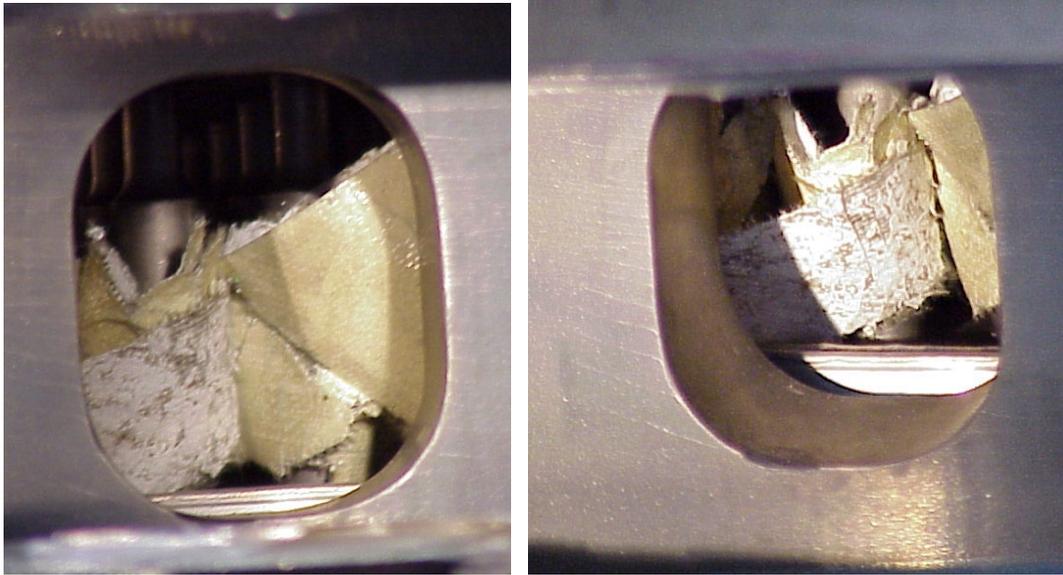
Tape Contamination Observed Through FPB Fuel Manifold Windows Upon Disassembly
